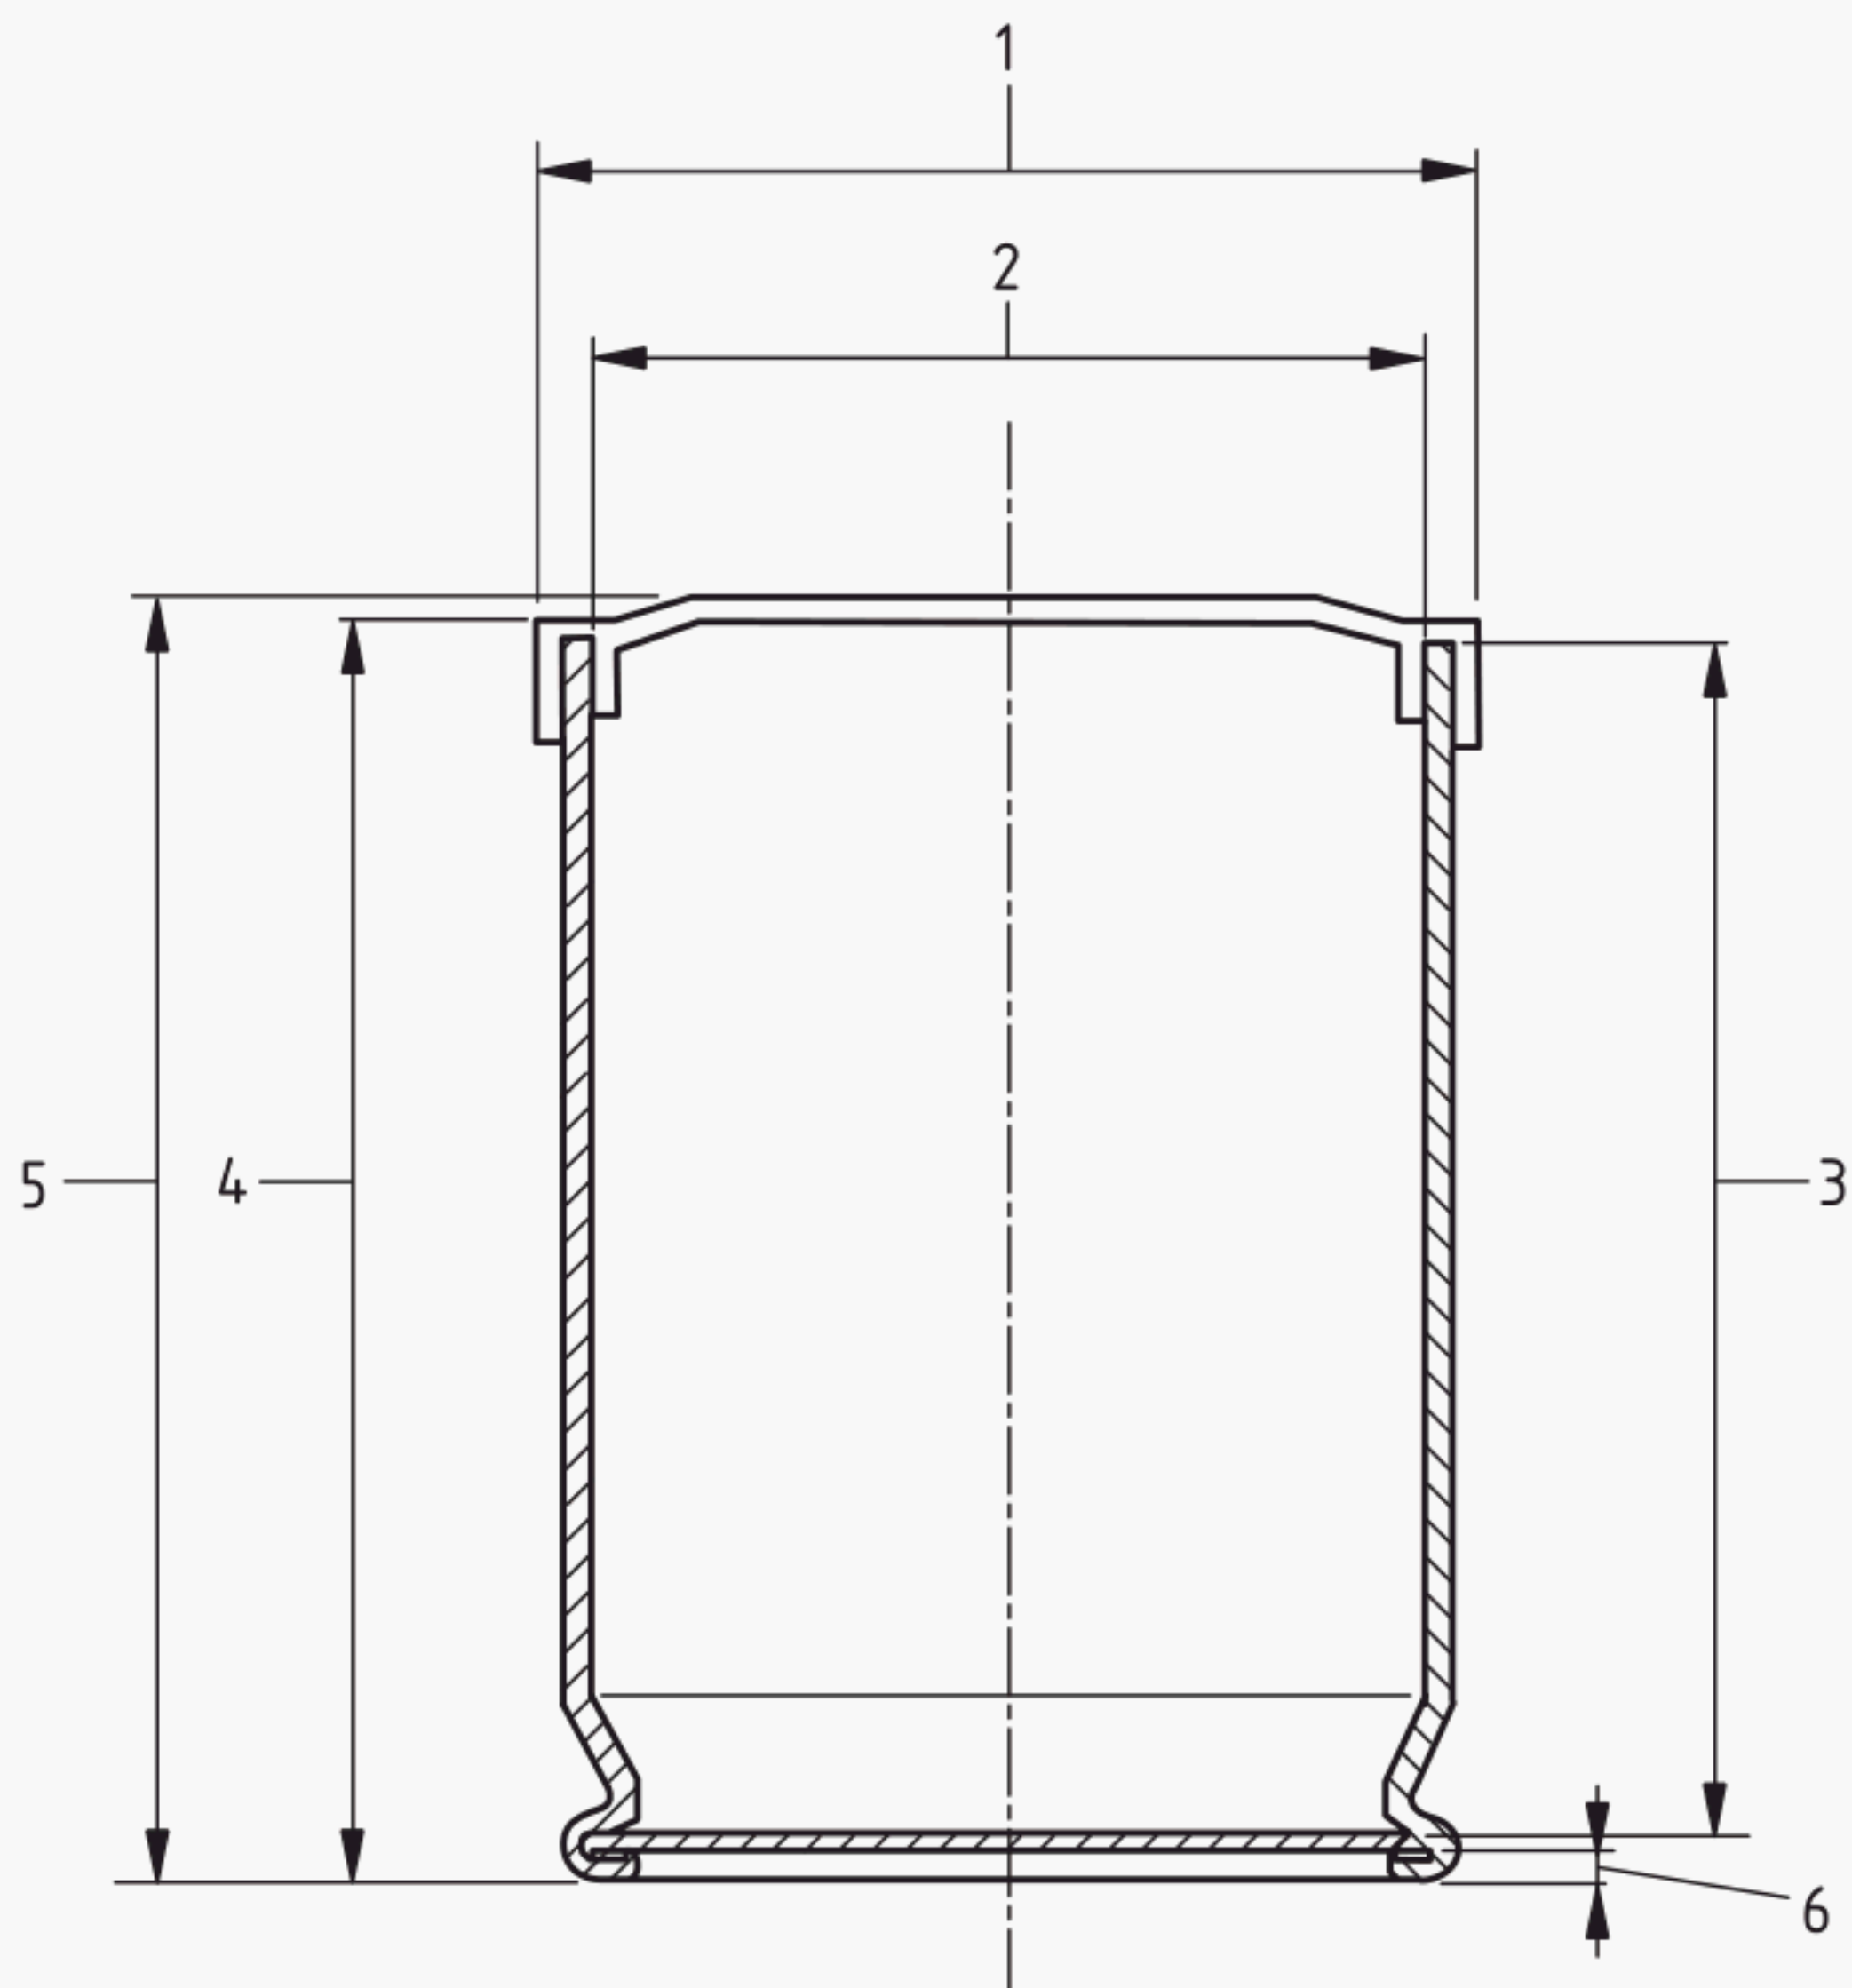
Dimensions – drum of circular cross section with fibreboard lid and right-angled profile base
